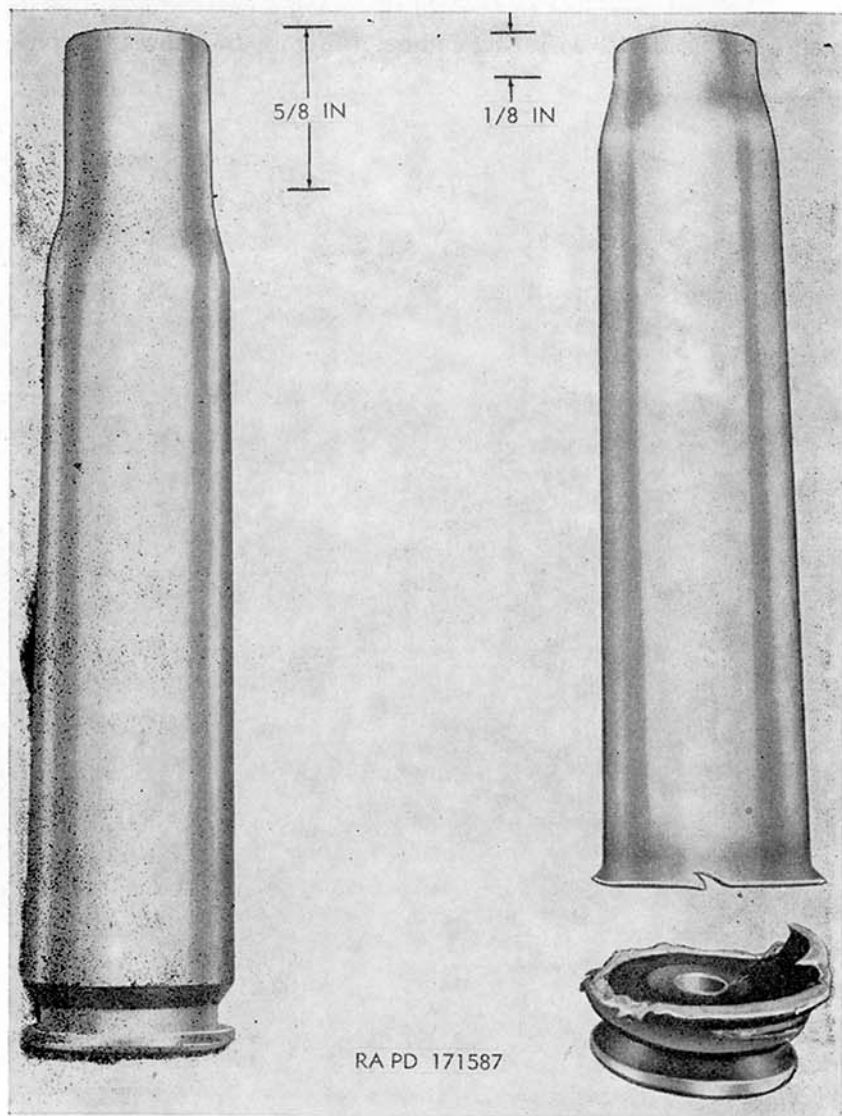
Cal..50 machine gun cartridge case ruptured due to excessive head space.
